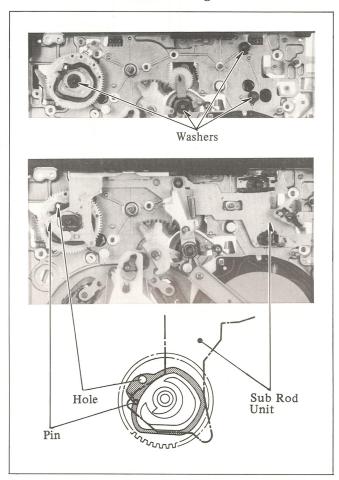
Assembly and Adjustment of Gears and Rods-(6)
